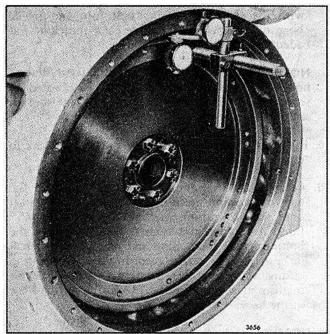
Checking Flywheel Housing Concentricity using Tool J 9737-01
